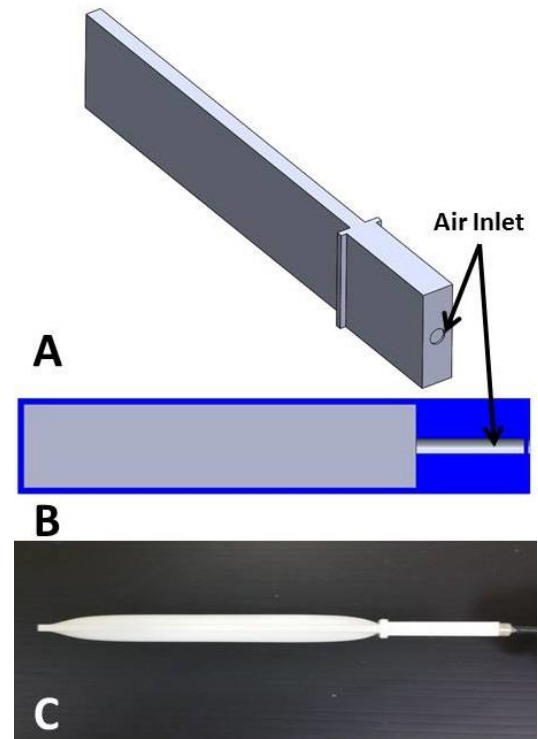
(A) Isometric and (B) sectional view of the soft pneumatic actuator. (C) Inflation of the pneumatic actuator.
